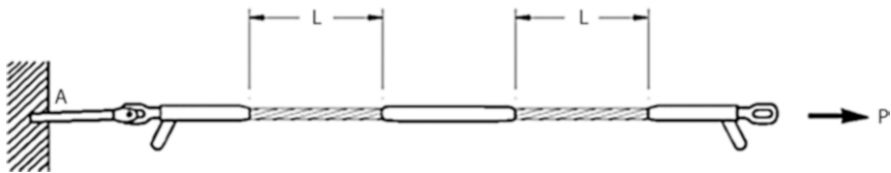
Typical tension fitting test (Splice shown, but not required for tension fitting test).
